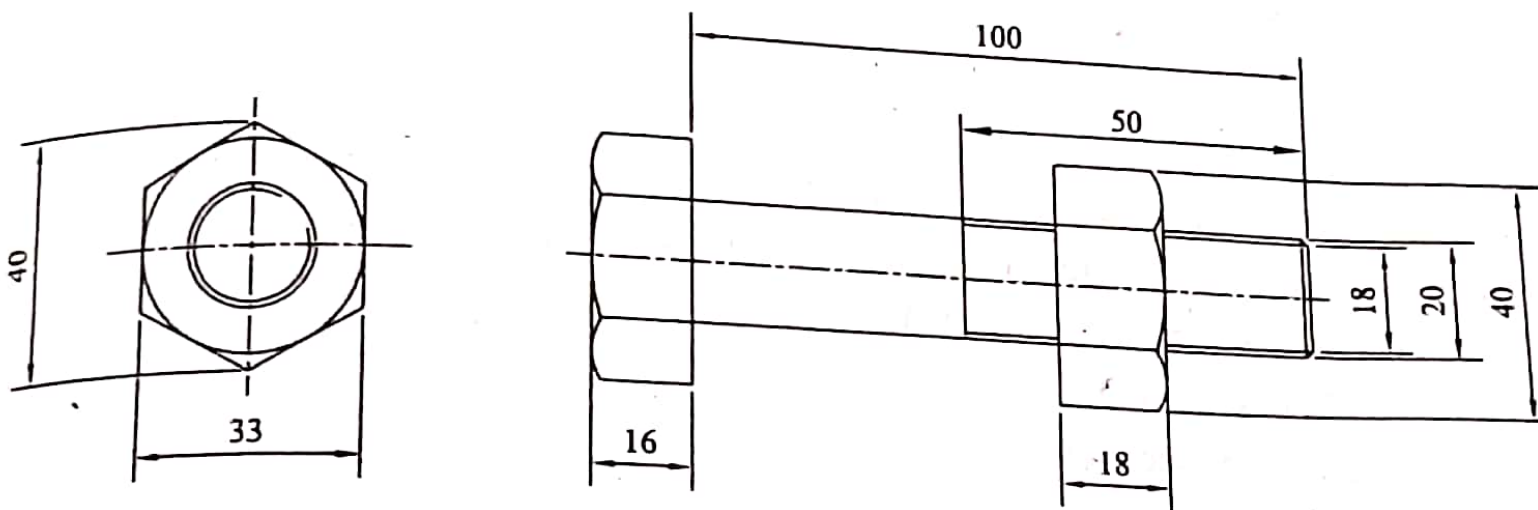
Front and side view of a hexagonal headed bolt across flats
